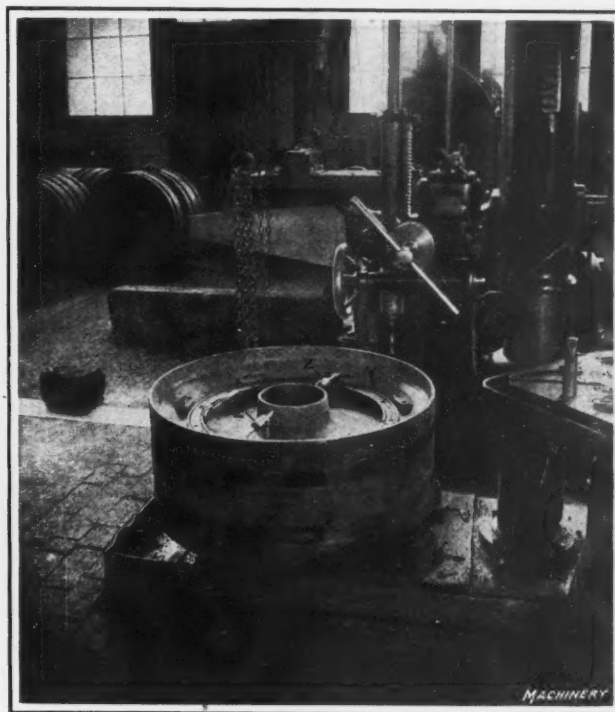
Vertical Drilling Machine equipped for drilling and tapping Twelve Holes in Brake-drum Seat
